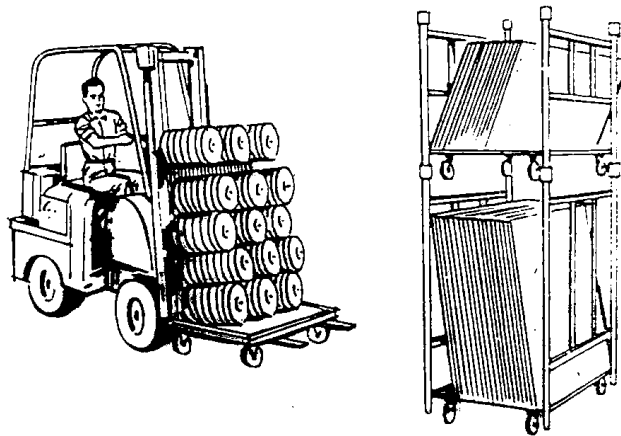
Unitized load on special racks with wheels which can be moved by forklift truck or by hand
